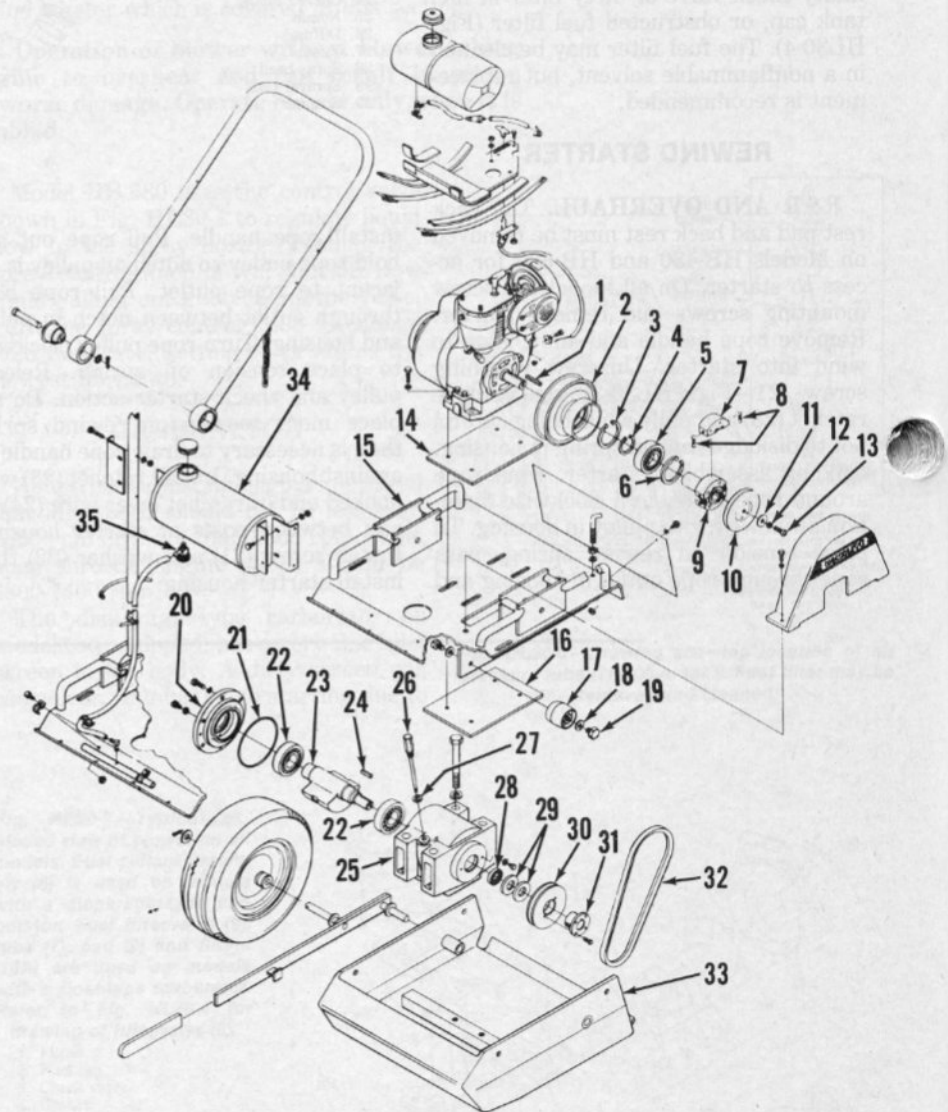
Exploded view of Model PCS-30 soil compactor. Model PCA-20 asphalt compactor is similar.
